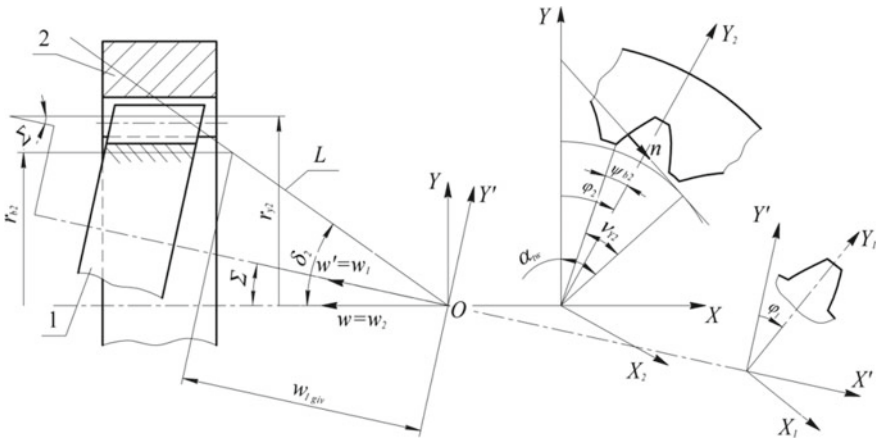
Meshing of the generating: 1—spur gear, 2—bevel gear
